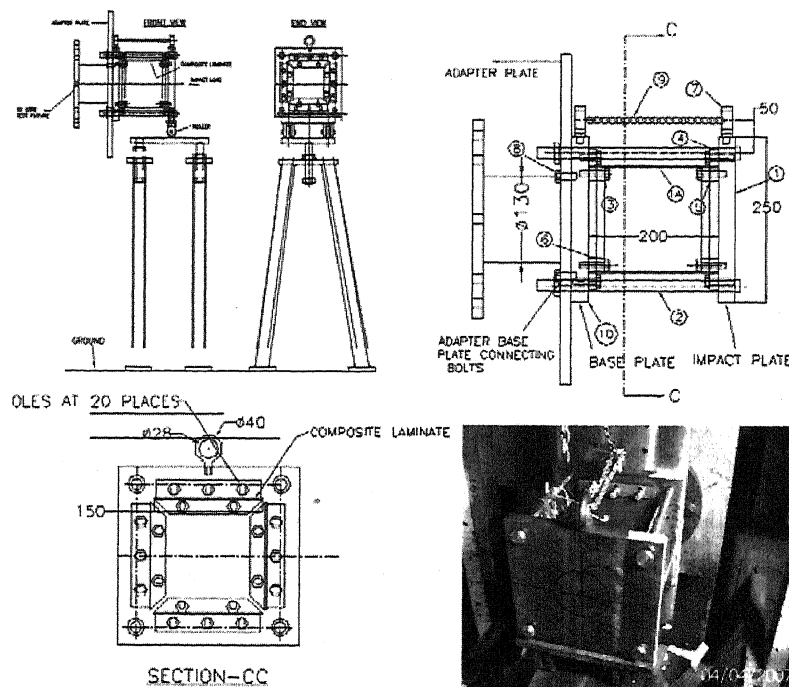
Diagram giving the details of Bird hit Test Fixture Assembly
